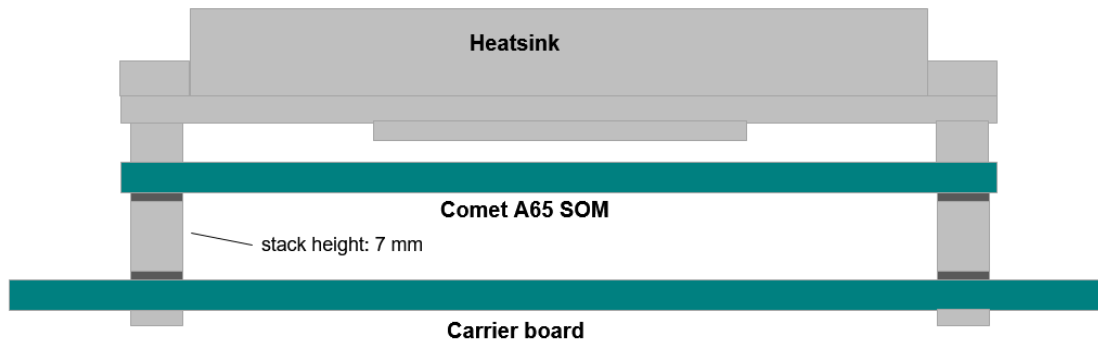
Mechanical Stack-up of Comet A65 SOM and Heatsink
